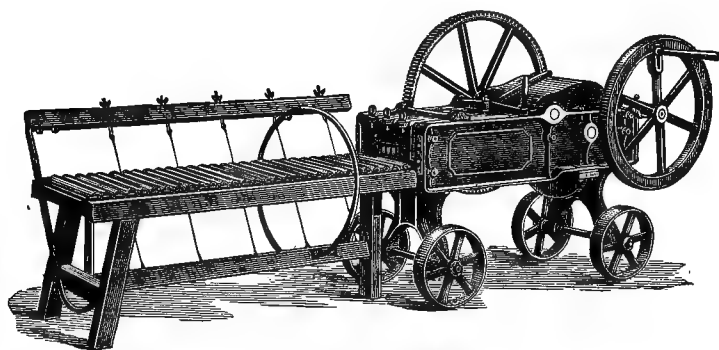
Hand-power brick machine, by J. Ollagnier.
